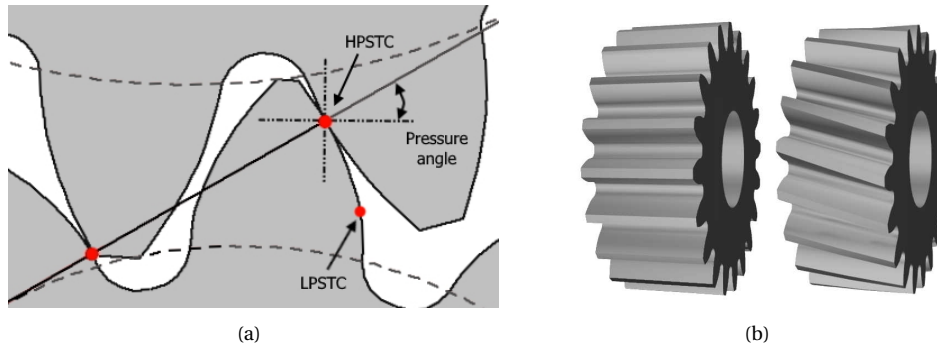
(a) Schematic overview of two gears in contact showing the pressure angle and the contact points at HPSTC. (b) Examples of a spur and helical gear with straight and angled teeth, respectively.
